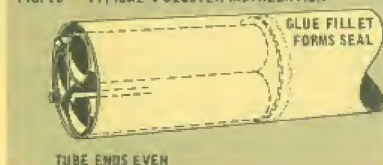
shows a typical engine mounting system for a three-engine model. The spaces between tubes are sealed at the front of the engine mounting tubes by gluing an adapter ring which fits the inside of the body in place as shown. To install the engine mount, smear a liberal amount of glue around the inside of the rear of the body tube. Immediately slide the engine mount unit into place so the rear of the engine mount tubes is even with the rear of the body and the engine retainer hooks project from the tube. Do not pause while inserting the engine mount or the glue may stick with the mount in the wrong place. Set the unit on its rear end while the glue dries.
